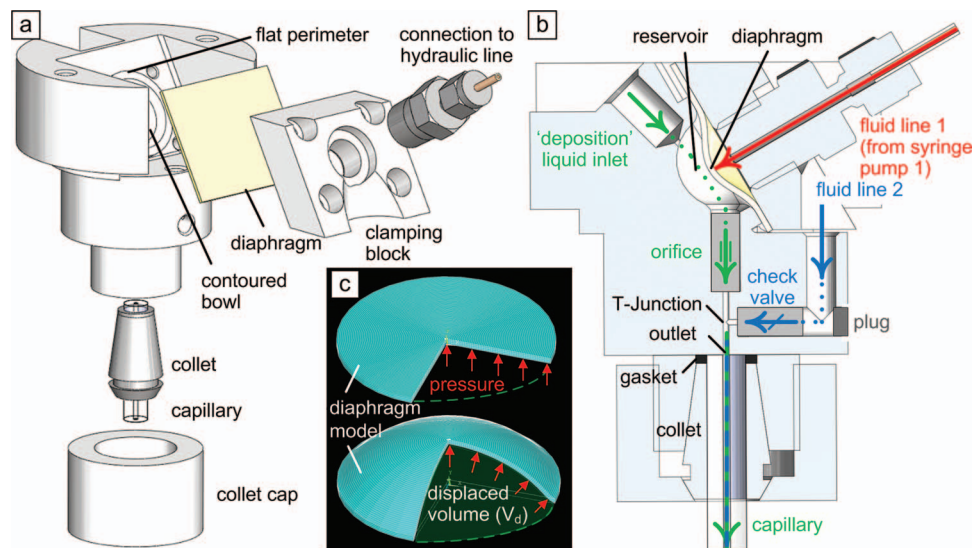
(Color online) Model and schematic of dispenser mechanism: (a) exploded view, showing how diaphragm is clamped over the bowl and capillary is held using a collet; (b) cross-section indicating flow paths; (c) finite element model of elastic diaphragm deformation.
